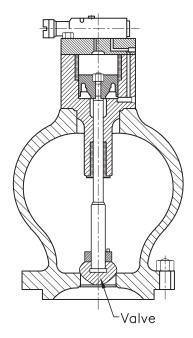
Sectional view of a fixed clearance pocket. Courtesy of Cooper Industries Energy Services Group.
